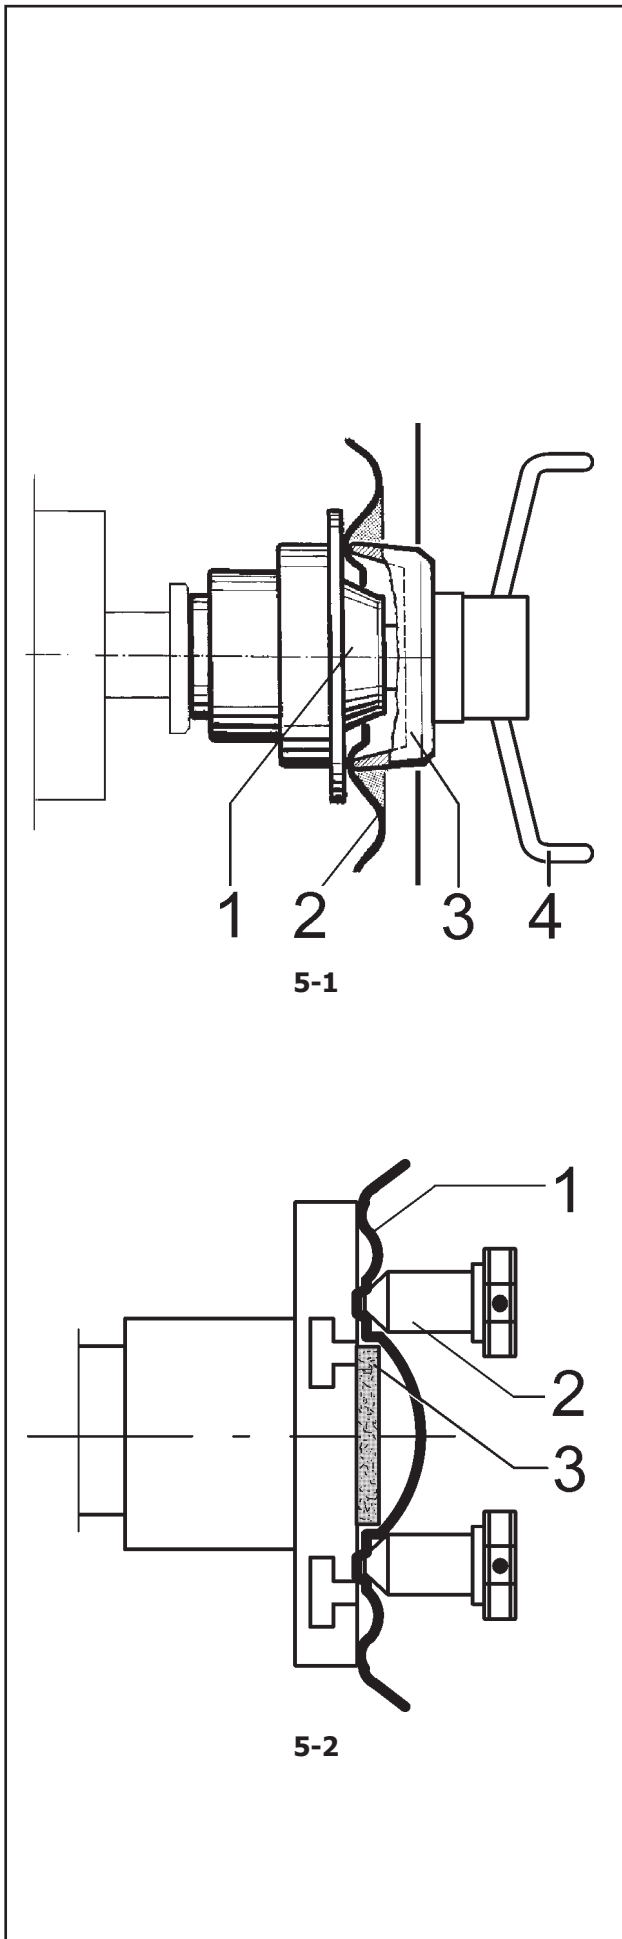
Clamping adaptor to clamp centre bore car wheels.
